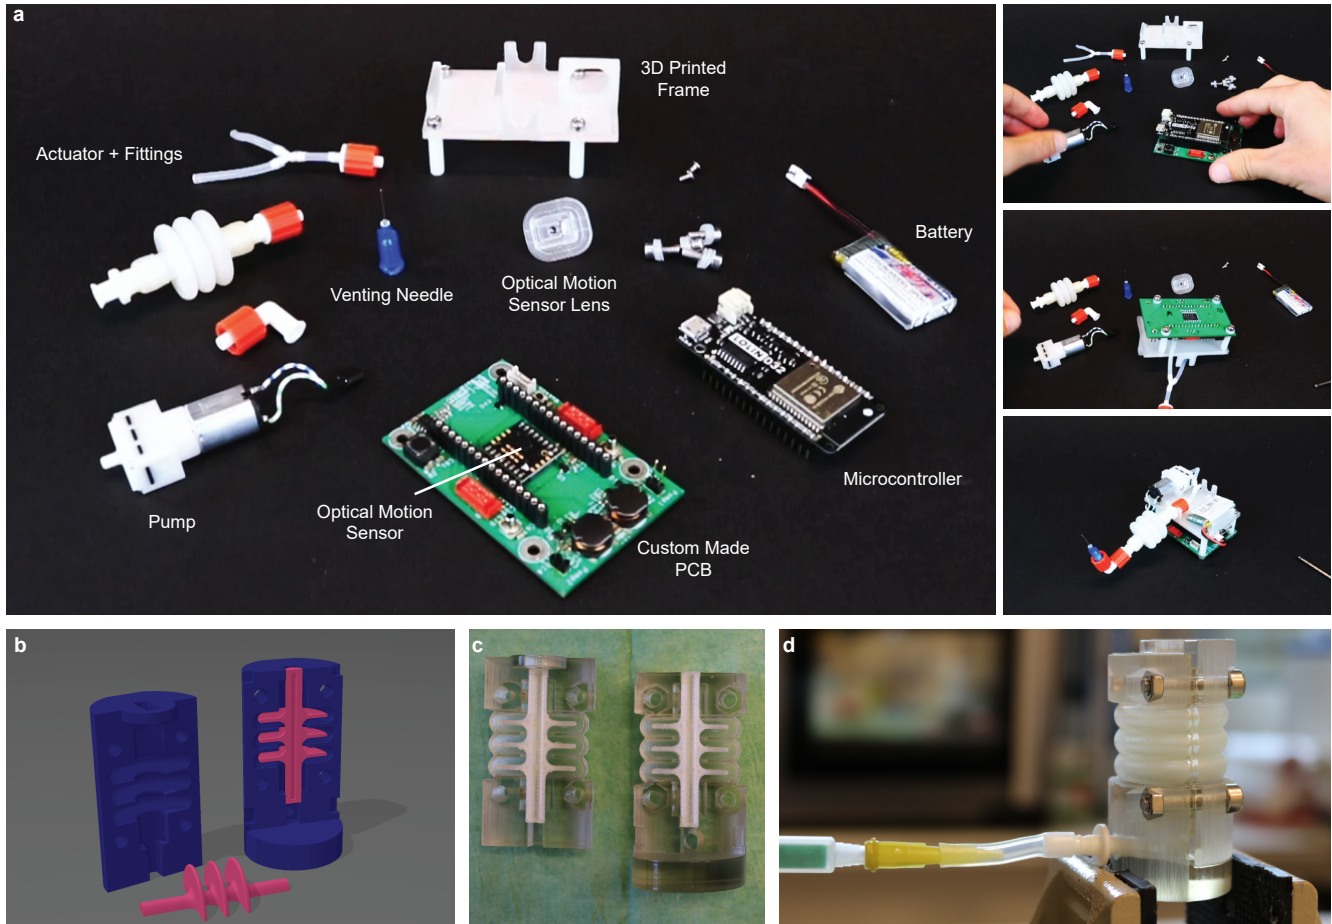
Unit assembly and bellow actuator fabrication. a, Overview of unit components and assembly process. b, CAD models of bellow actuator moulds. The outer mould (in blue) was printed in VeroClear (Stratasys Eden260VS), and the inner core (in pink) was printed in soluble PVA (Ultimaker 3). c, 3D printed parts before casting. d, Injection casting of bellow actuator with Dragon Skin 30 (Smooth-ON).
